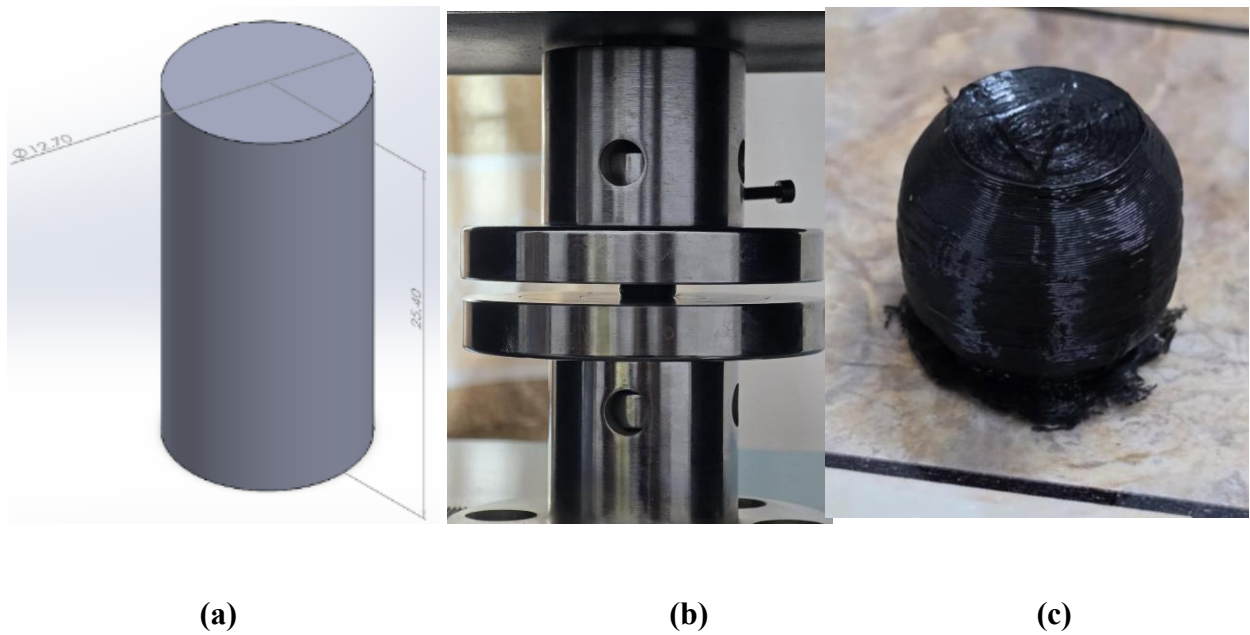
ASTM D695 for TPU (a)Specimen Design, (b)Experimental setup (during testing), and (c)Specimen after testing
